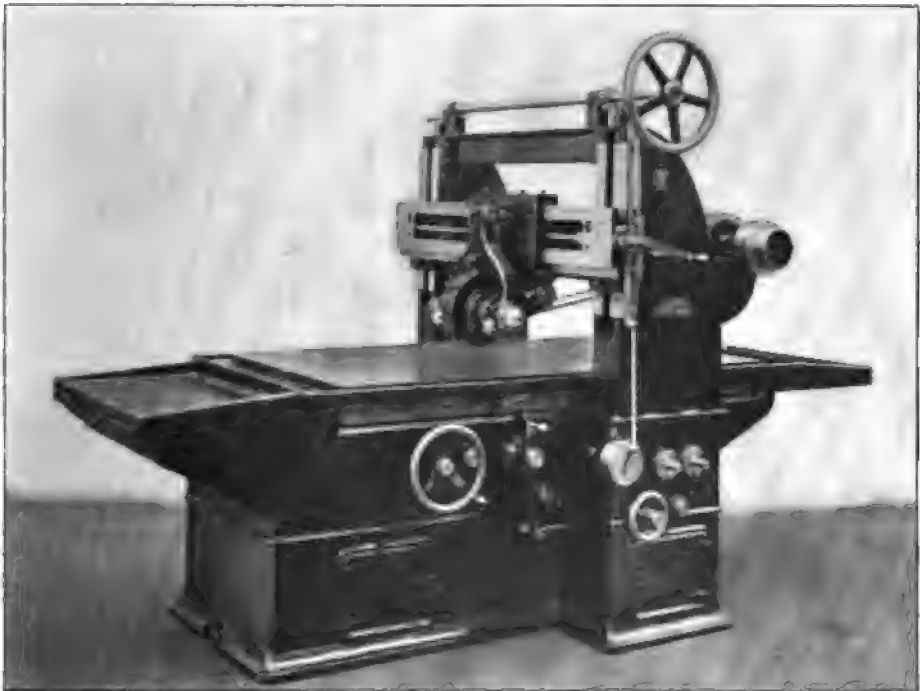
PLANER TYPE SURFACE GRINDING MACHINE BUILT BY J. E. REINECKER
